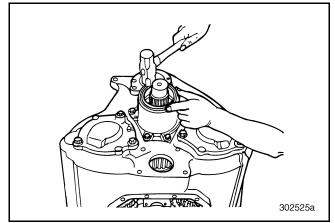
Installing Output Housing Oil Seal (T313L21/T318L21 Shown)
